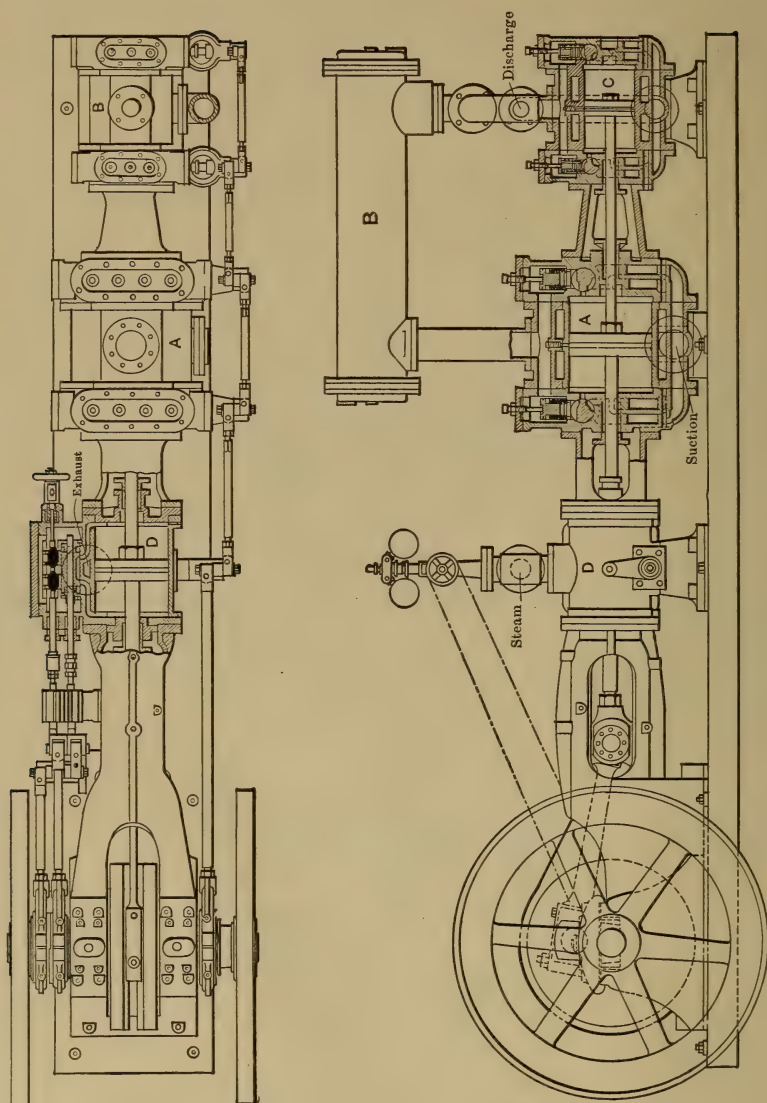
TWO-STAGE AIR COMPRESSOR WITH INTERCOOLER.
